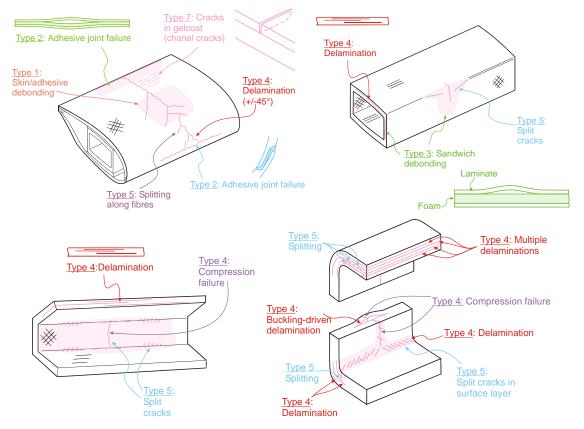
Sketches of observed failure modes in a wind turbine blade purposely tested to failure [15]; damages in the aeroshell and box girder.
